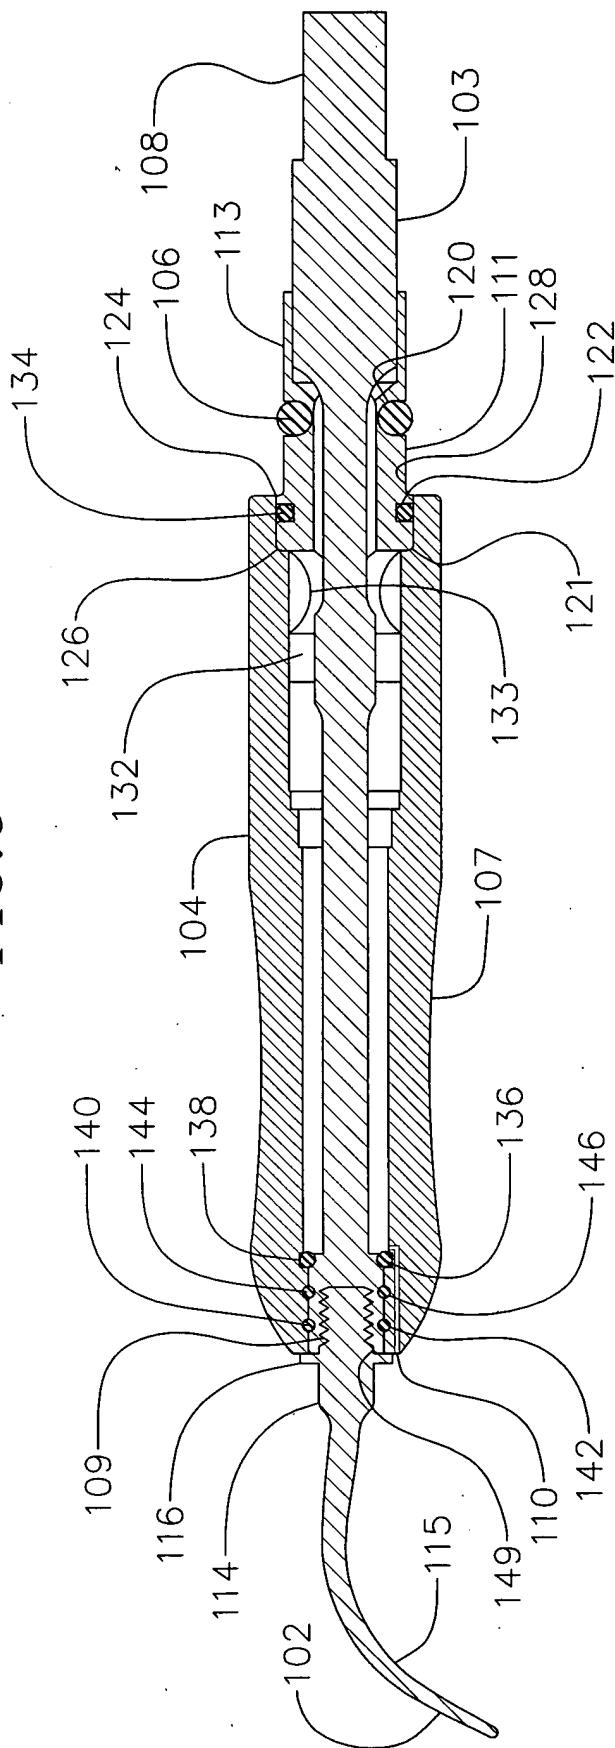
is a cross-sectional view of a medical device assembly, likely a catheter or probe, showing internal components and a handle. The device has a central shaft with a distal tip and a handle with a trigger mechanism. Various parts are labeled with reference numerals:
